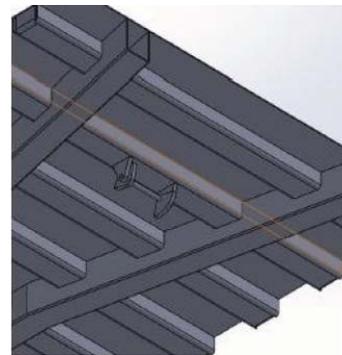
CAD model - position of the vibratory motor, with bearings mounted
